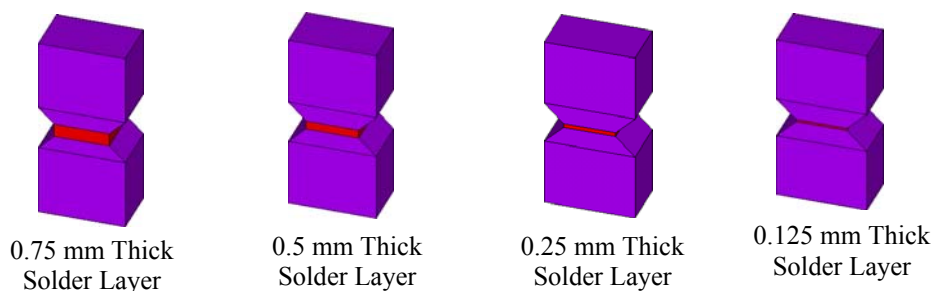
Iosipescu Shear Specimen with Solder Layer having Different Thicknesses
